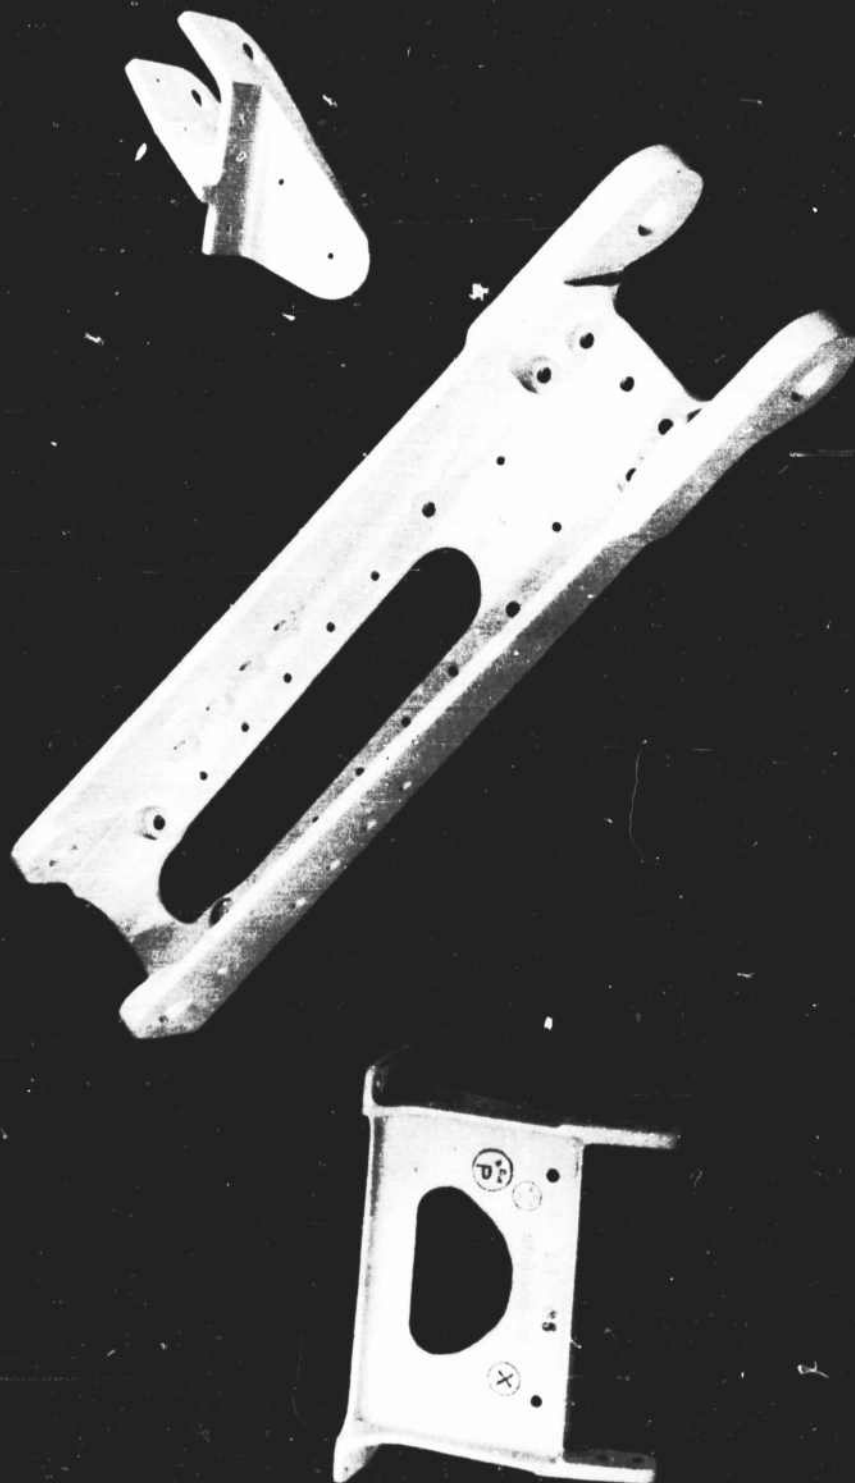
TYPICAL MAGNESIUM ALLOY SAND CASTINGS AFTER MACHINING
